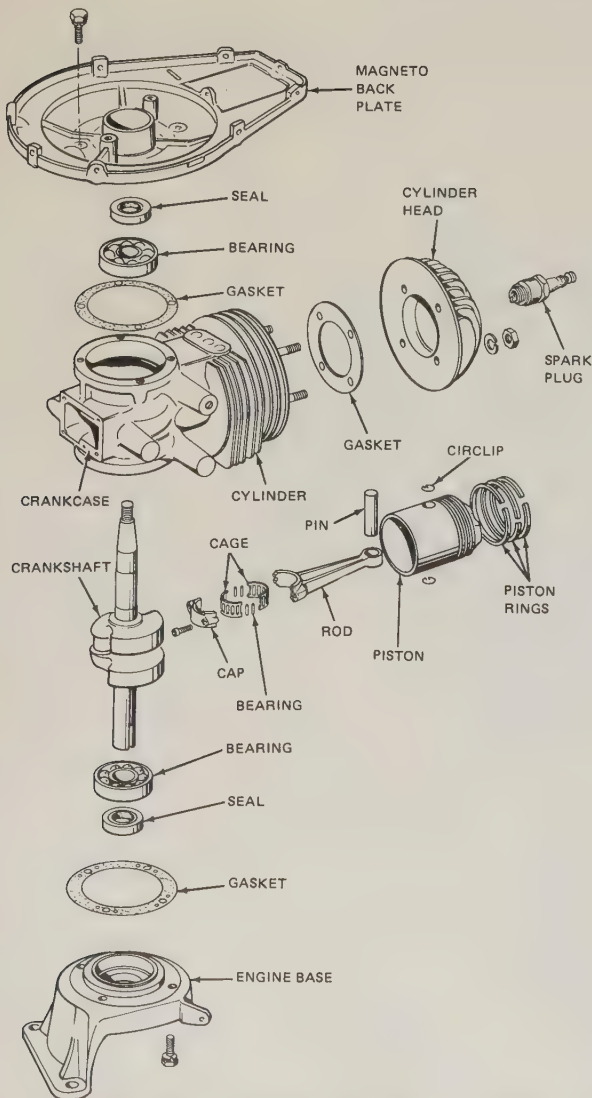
Completely disassembled view of a single-cylinder two-cycle engine. (Jacobsen Manufacturing Company)
